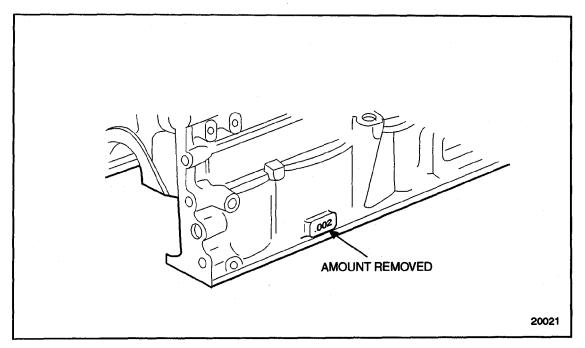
Recording Stock Removal on Cylinder Block Pad
